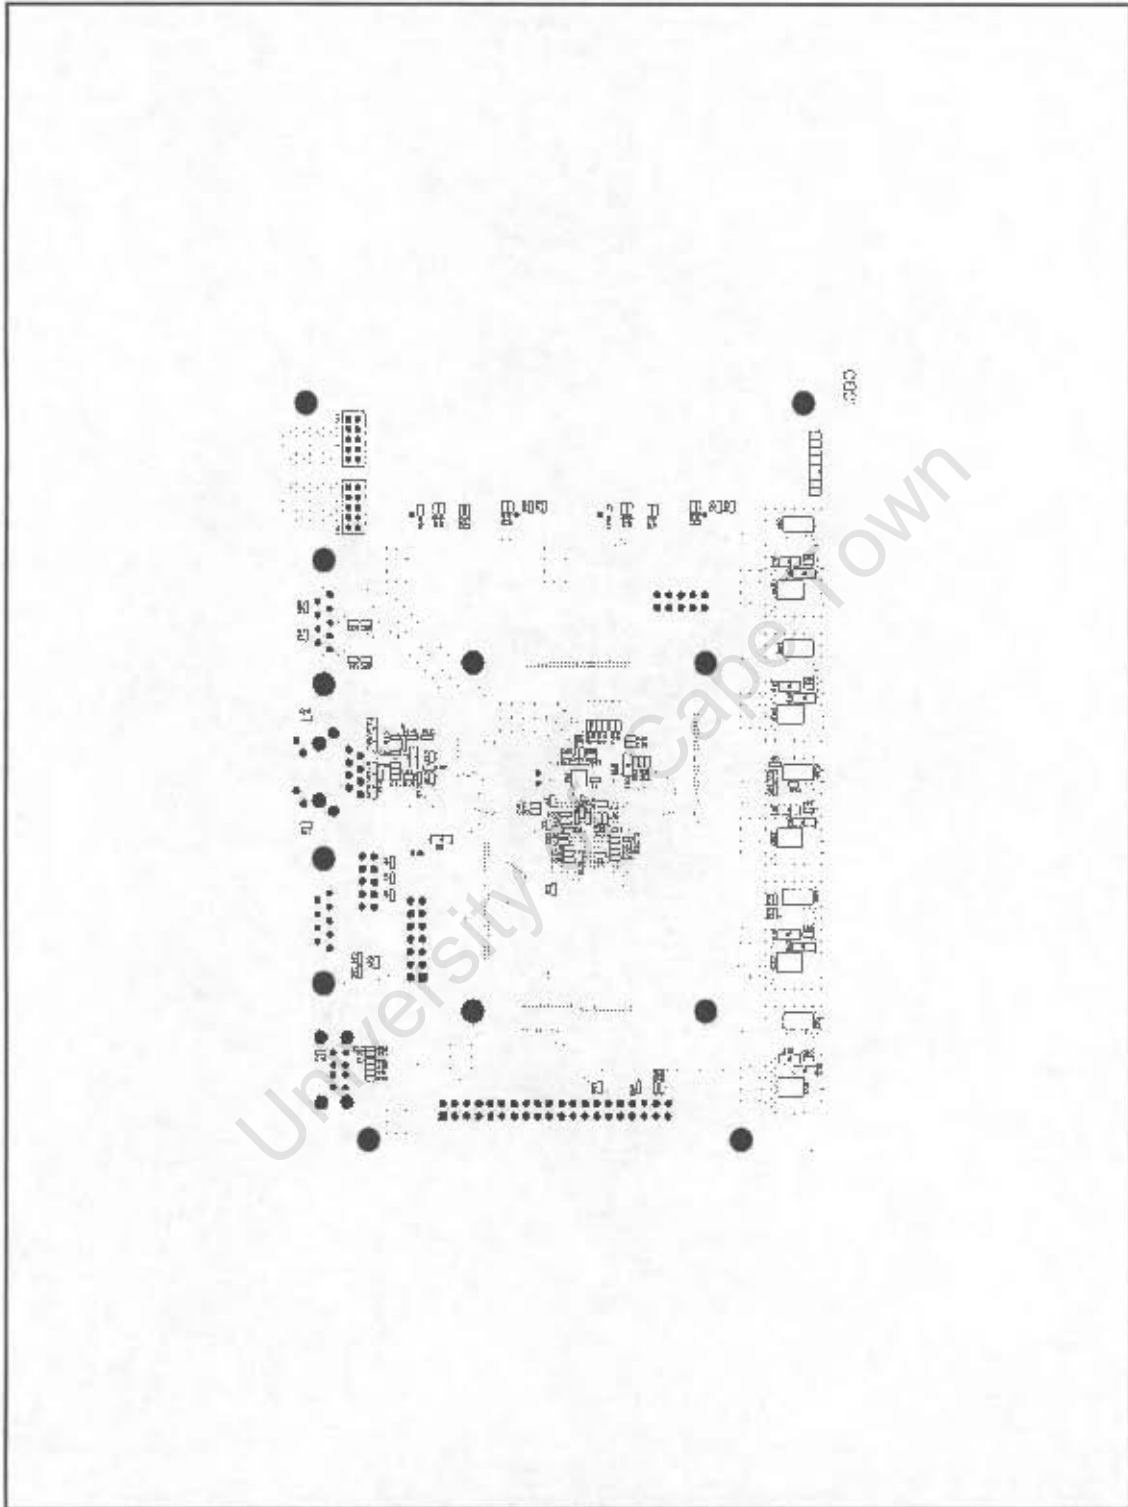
RUI Motherboard PCB Layout - Bottom Overlay Layer
